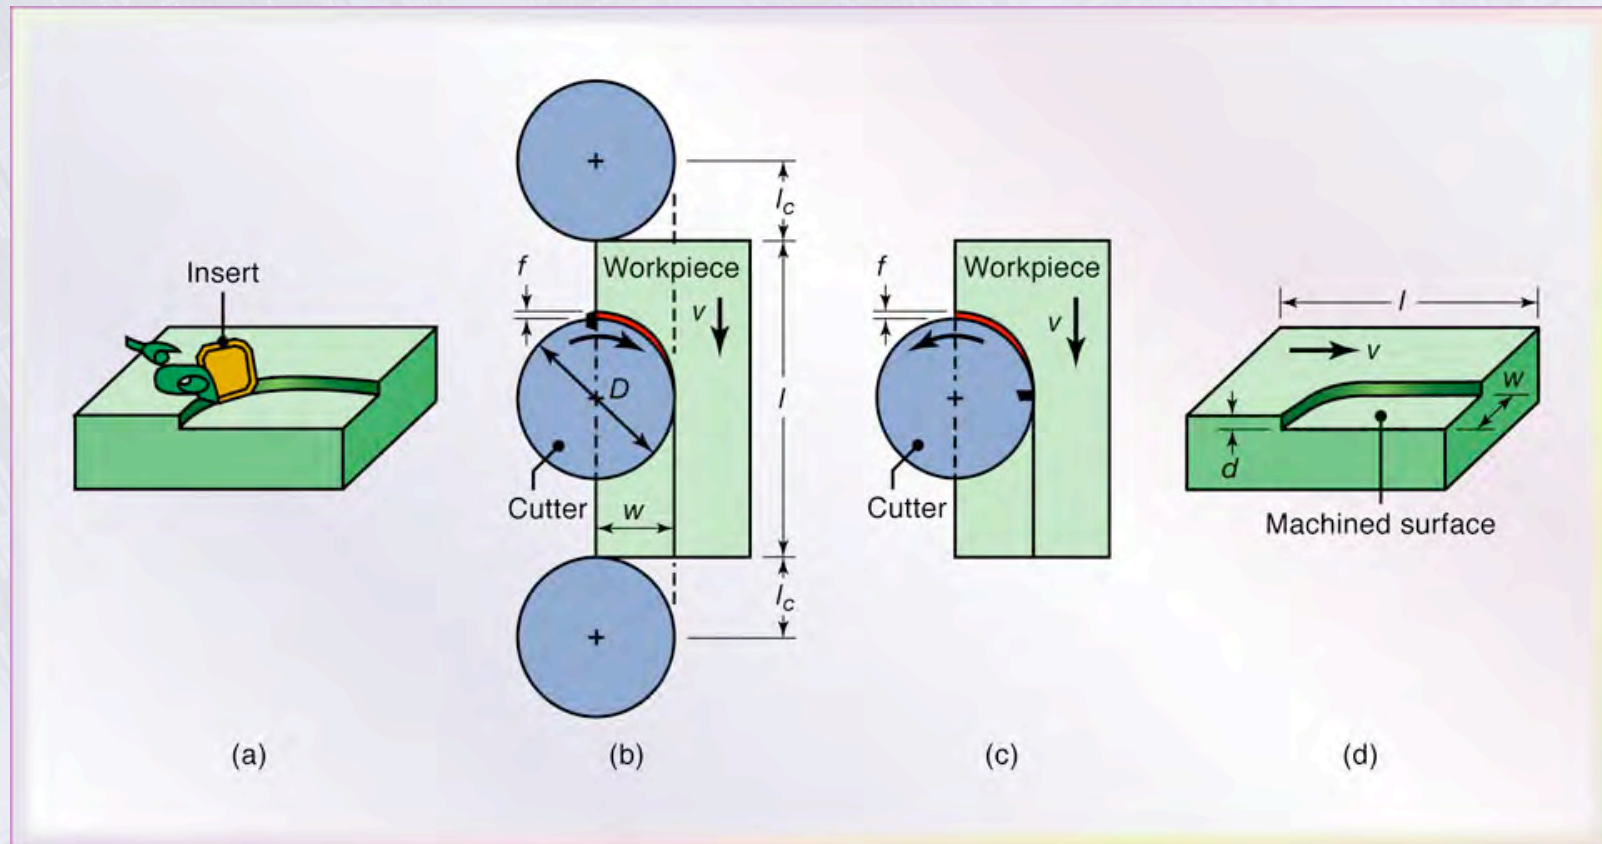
Face-milling operation showing (a) action of an insert in face milling; (b) climb milling; (c) conventional milling; (d) dimensions in face milling. The width of cut, w , is not necessarily the same as the cutter radius.
